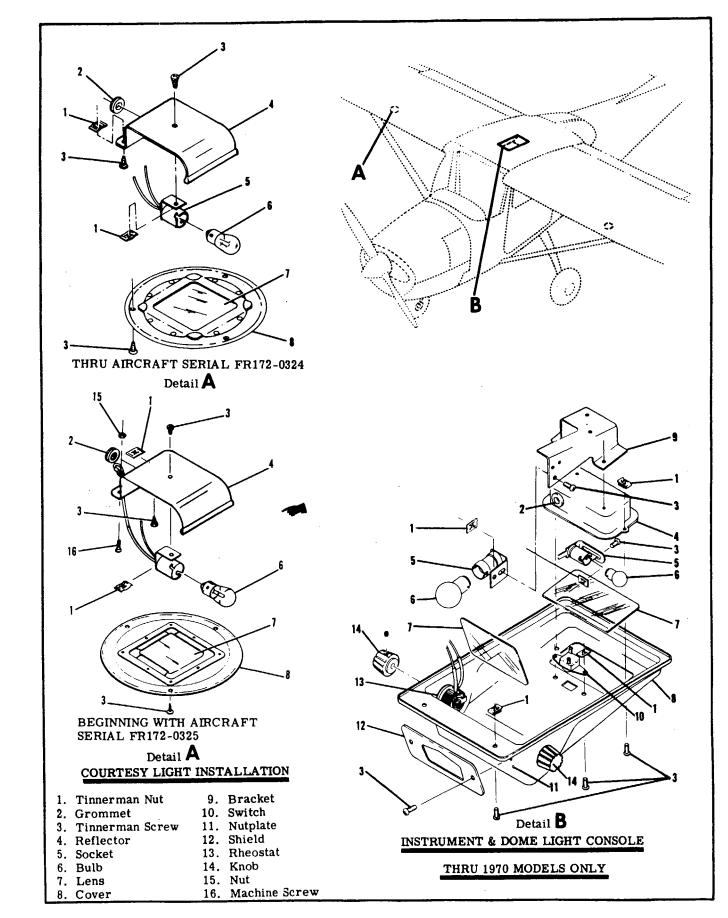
Instrument, Dome and Courtesy Light Installation (Sheet 1 of 2)
